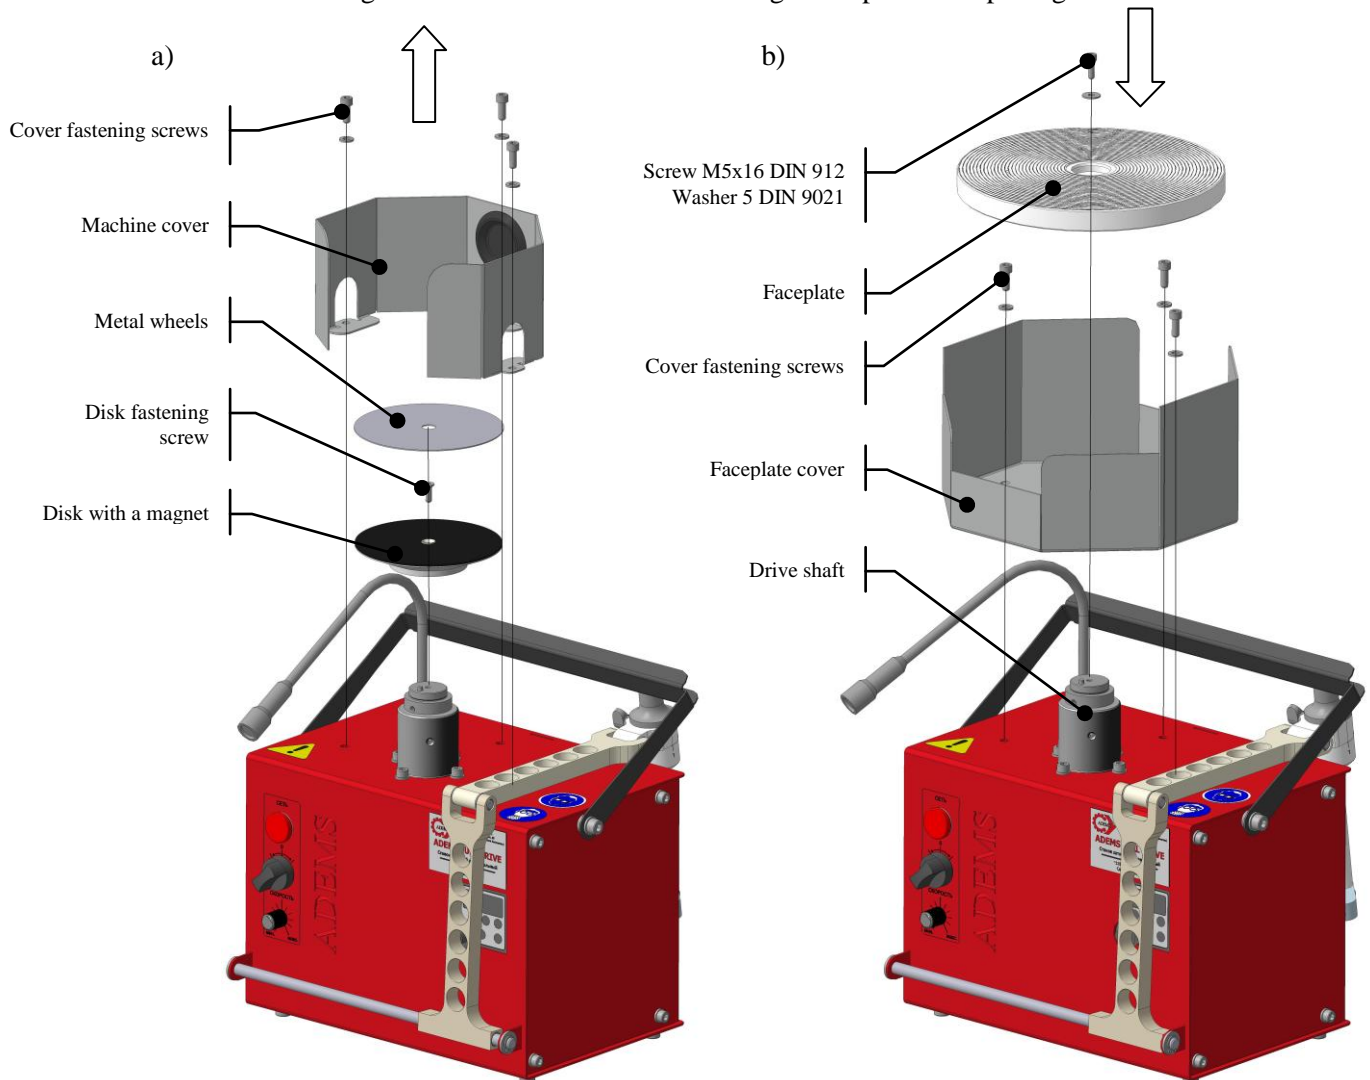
Preparation of the knives and meat grinder plates sharpening machine
